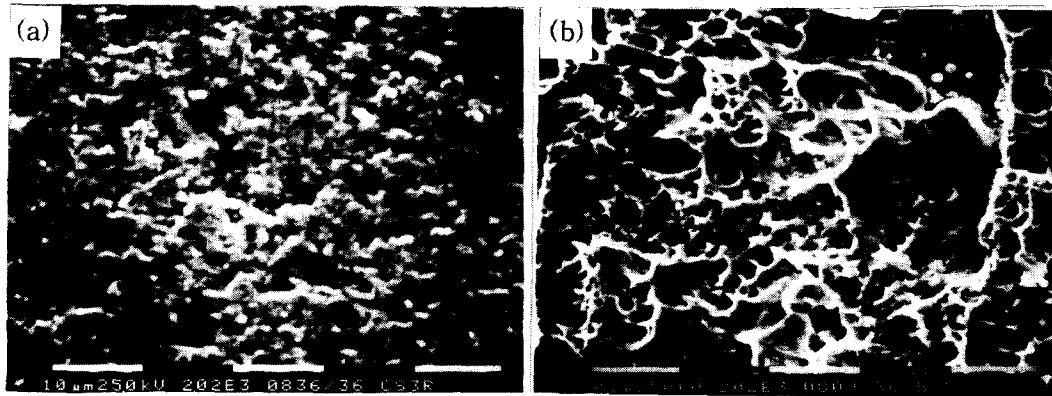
Fracture surfaces of high strength joints. (a) Intergranular fracture for the joint coated with Sn at 400V/0.1A/30min. and bonded at 290°C/0sec. (b) Ductile fracture for the joint coated with Sn/Pb at 400V/0.1A/30min. -420V/0.08A/15min. and bonded at 260°C/0sec.
